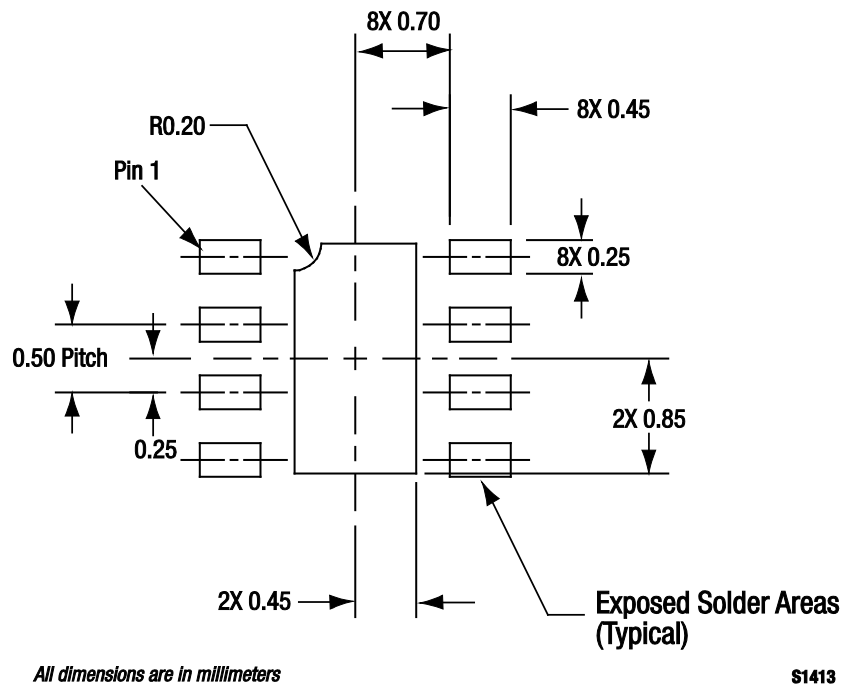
SKY67002-396LF PCB Layout Footprint (Top View)
